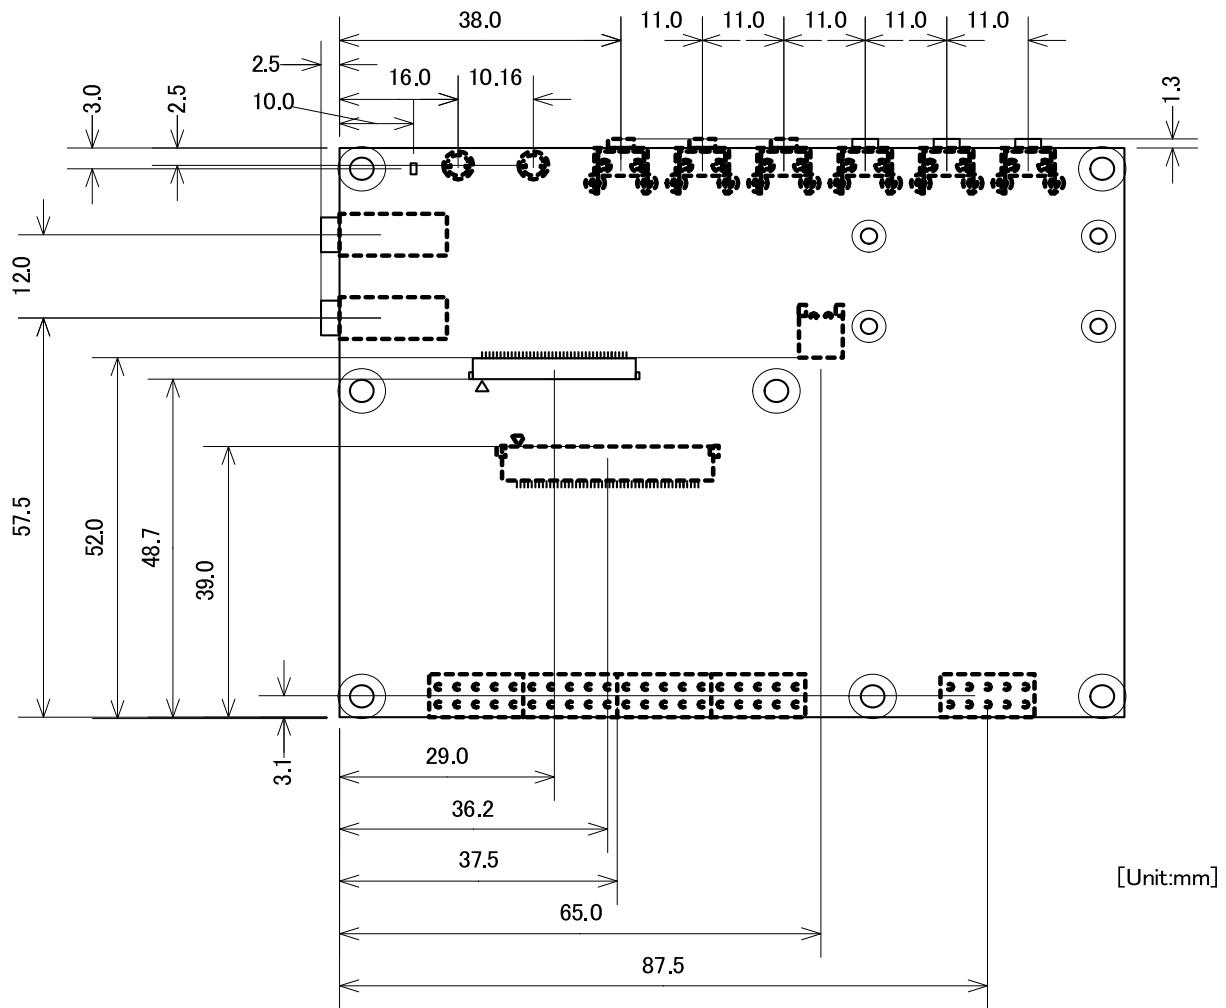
LCD Expansion Board (Product Revision A) Connector Locations
